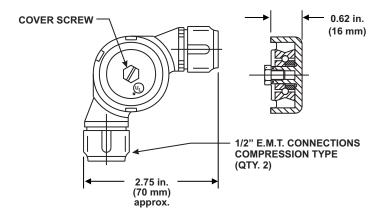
1/2-Inch E.M.T. Corner Pulley, General Applications
